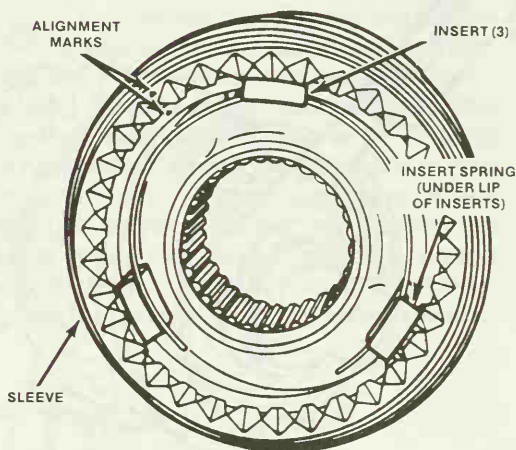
Second-third synchronizer assembly. (American Motors Corporation)
